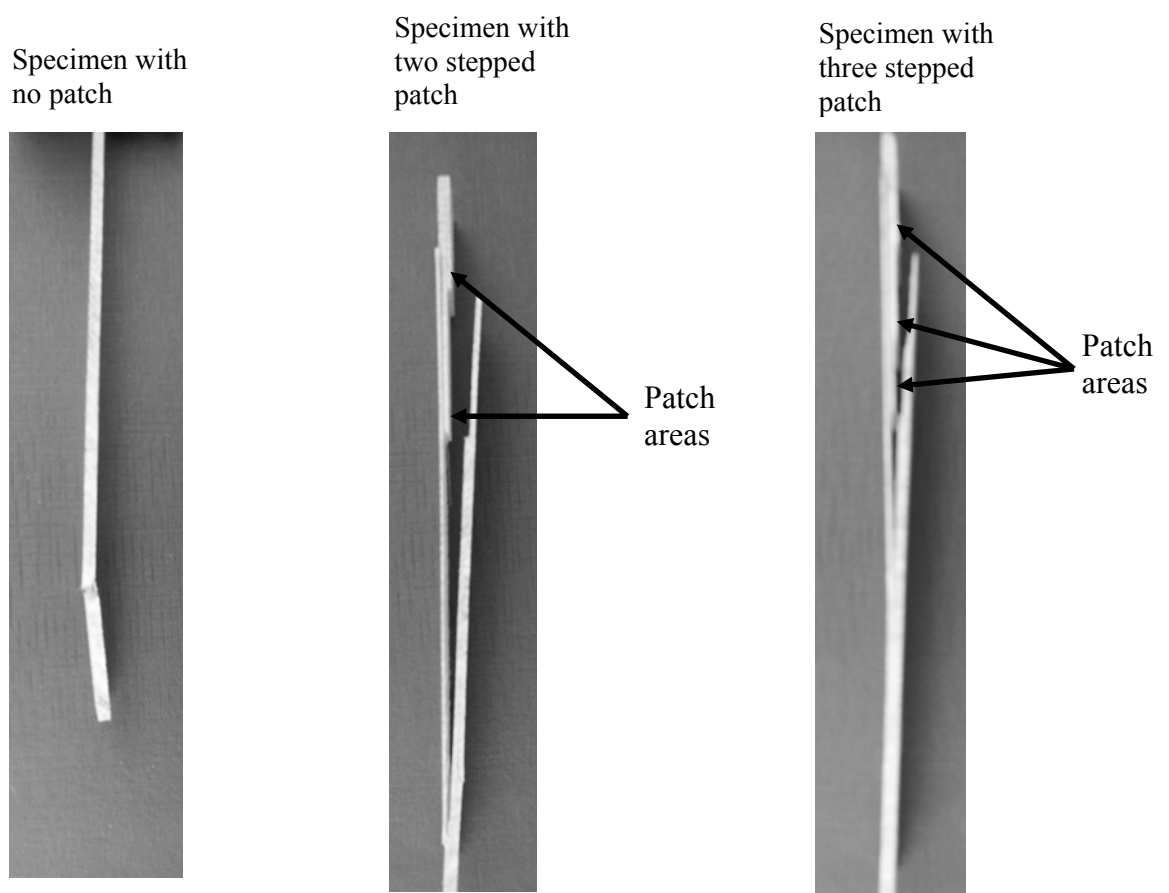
Fracture surfaces of woven glass/epoxy composite specimens after the tension
